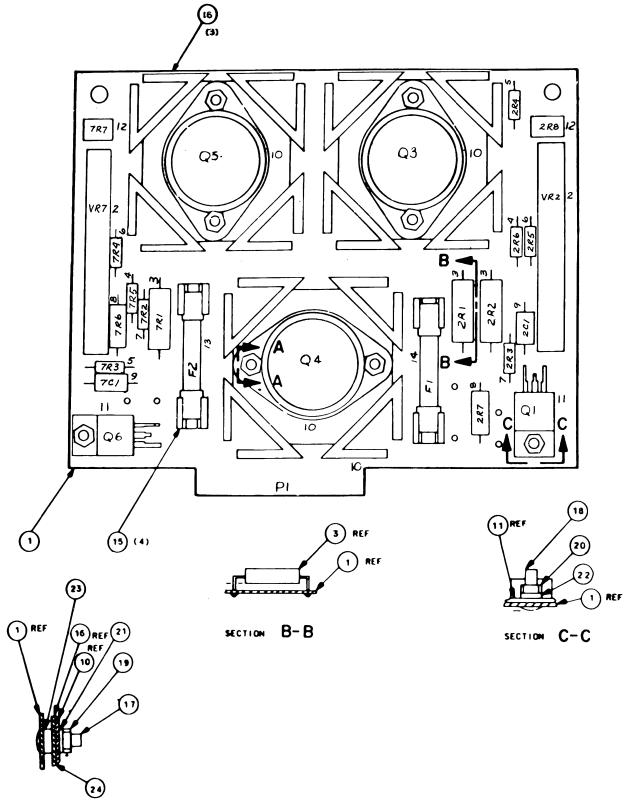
POWER SUPPLY MOTHER BOARD (SHEET 3 OF 3)
